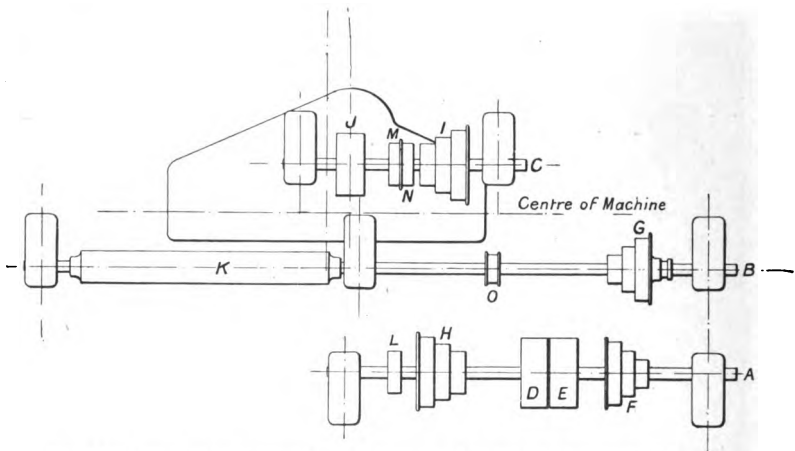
Plan of Countershafts for Universal Cylindrical Grinding Machine.
